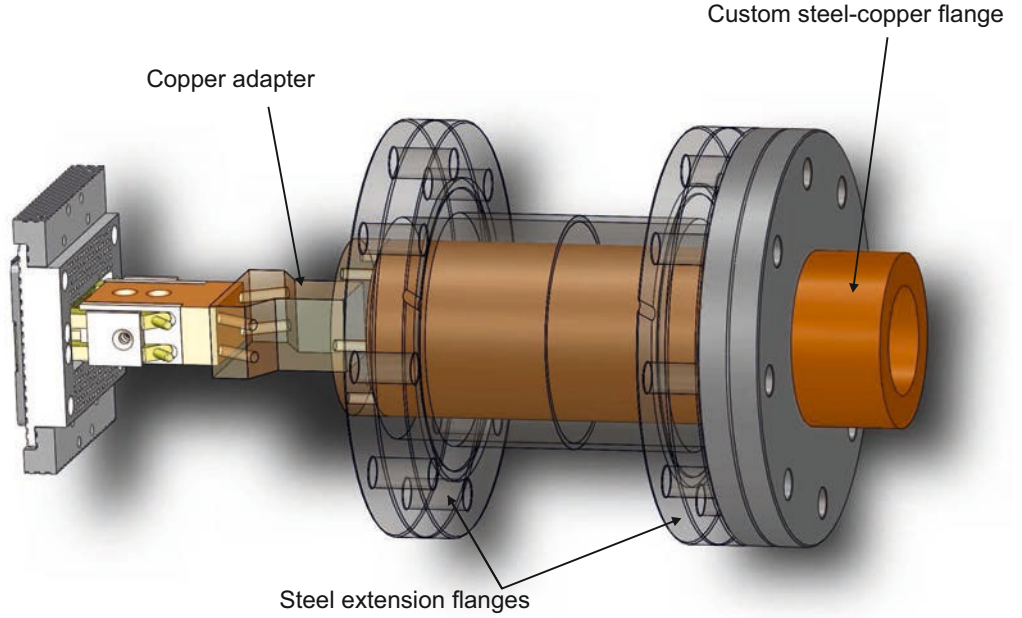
Showing the entire thermal bridge, copper adapter, steel-copper flange and steel extension flanges.
